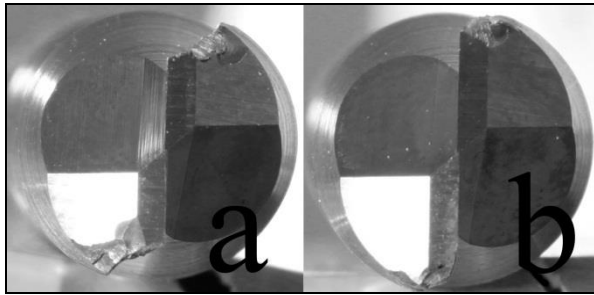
Pictorial view of the uncoated solid carbide cutting tools after machining under a) dry and b) cryogenic conditions
